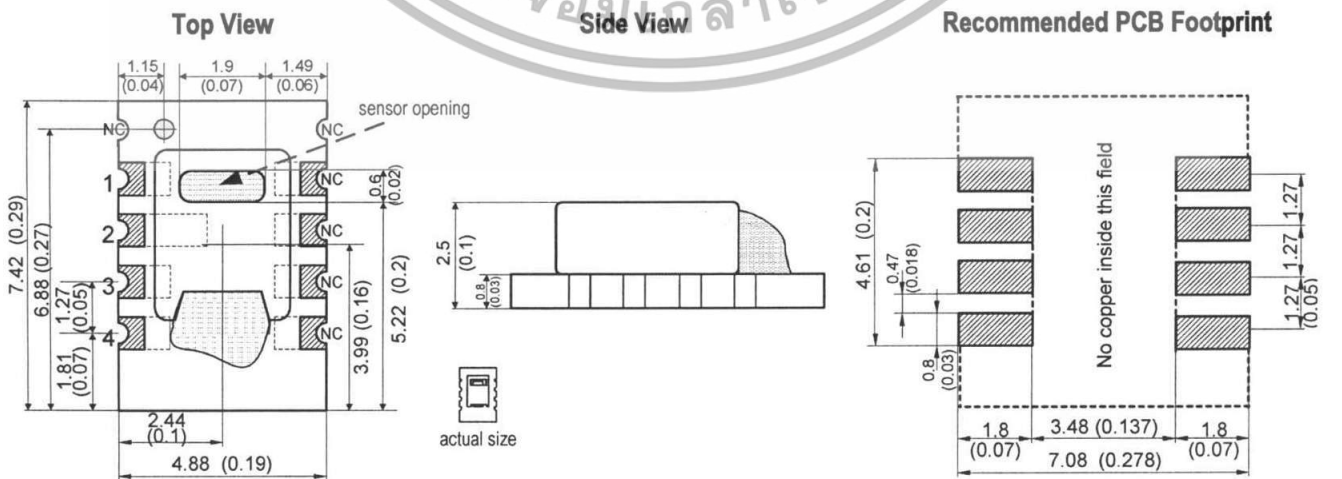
SHT1x drawing and footprint dimensions in mm (inch)
